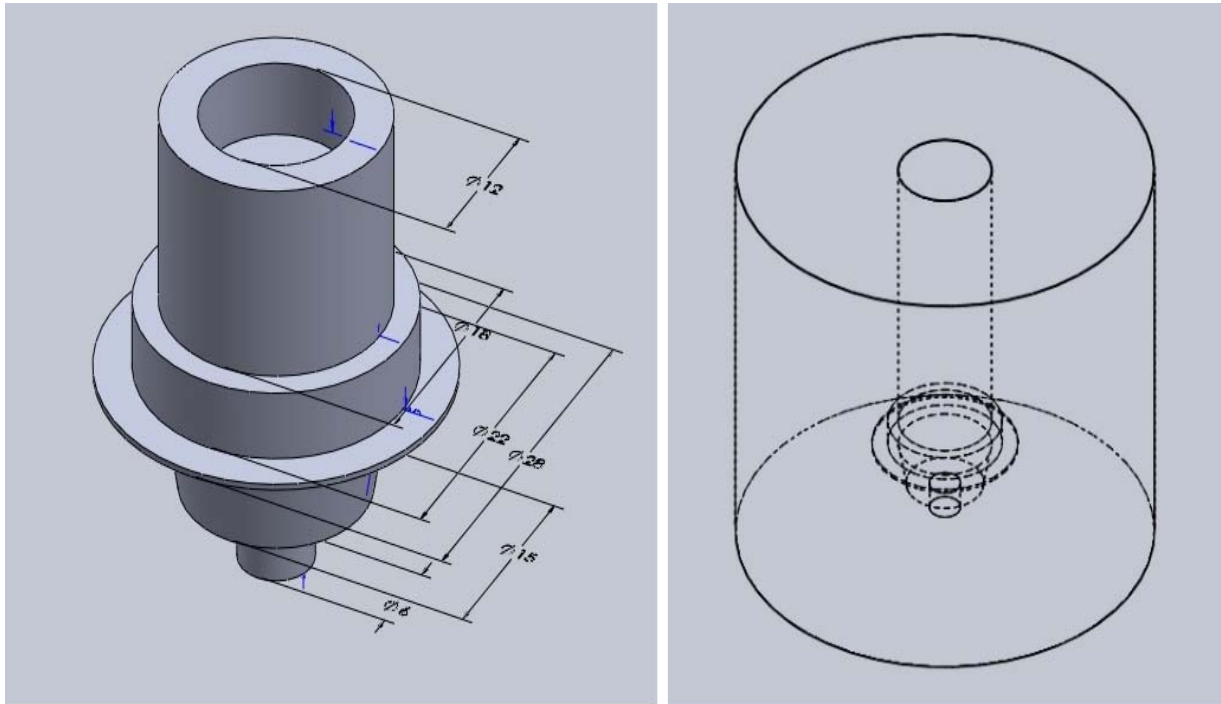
Die design using the dimensions of Collet chuck holder
